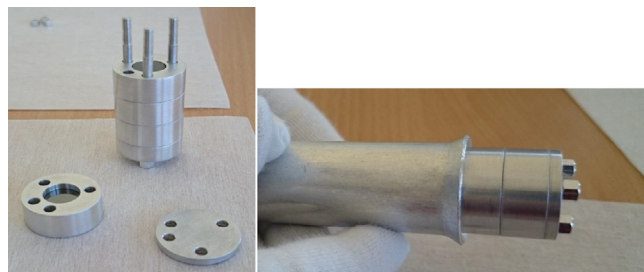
Sample holder fabrication and installation in the aluminium capsule.
